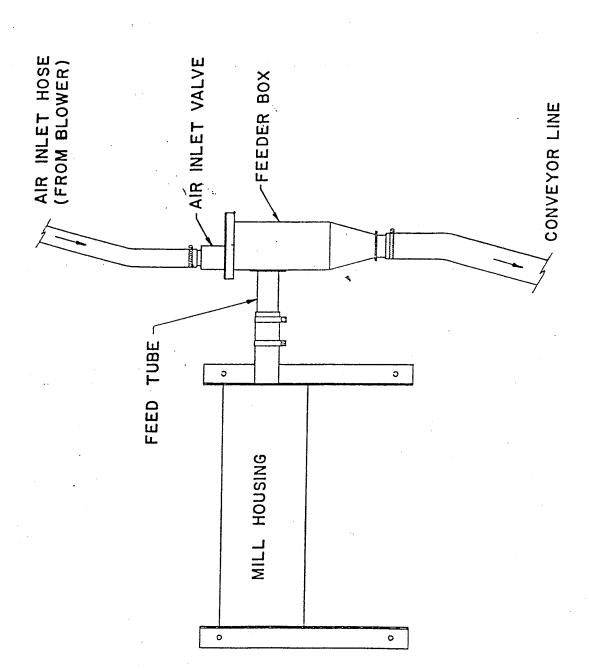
TYPICAL SCREW FEEDER INSTALLATION
